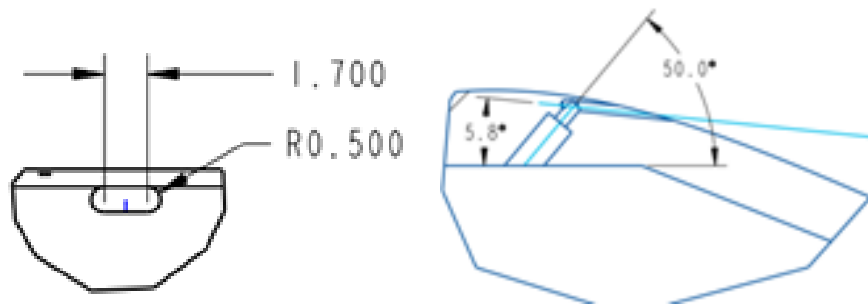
Drawing details of flow injection slot (dimensions in mm)
